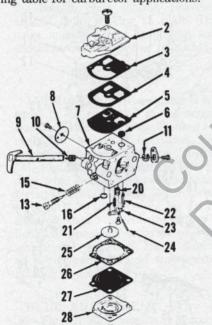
Exploded view of typical Zama carr used on ST-120 trimmer.
